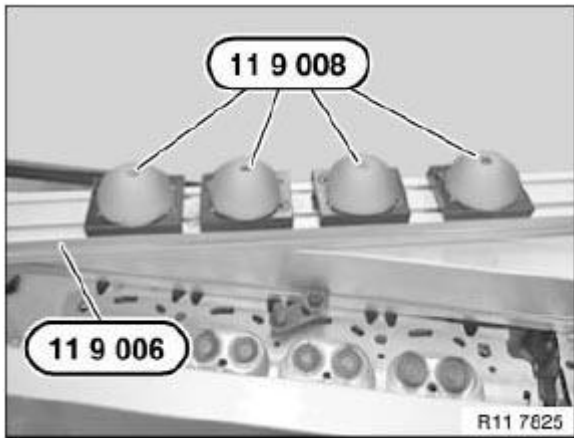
Identifying Special Tool (11 9 008 And 11 9 006)
